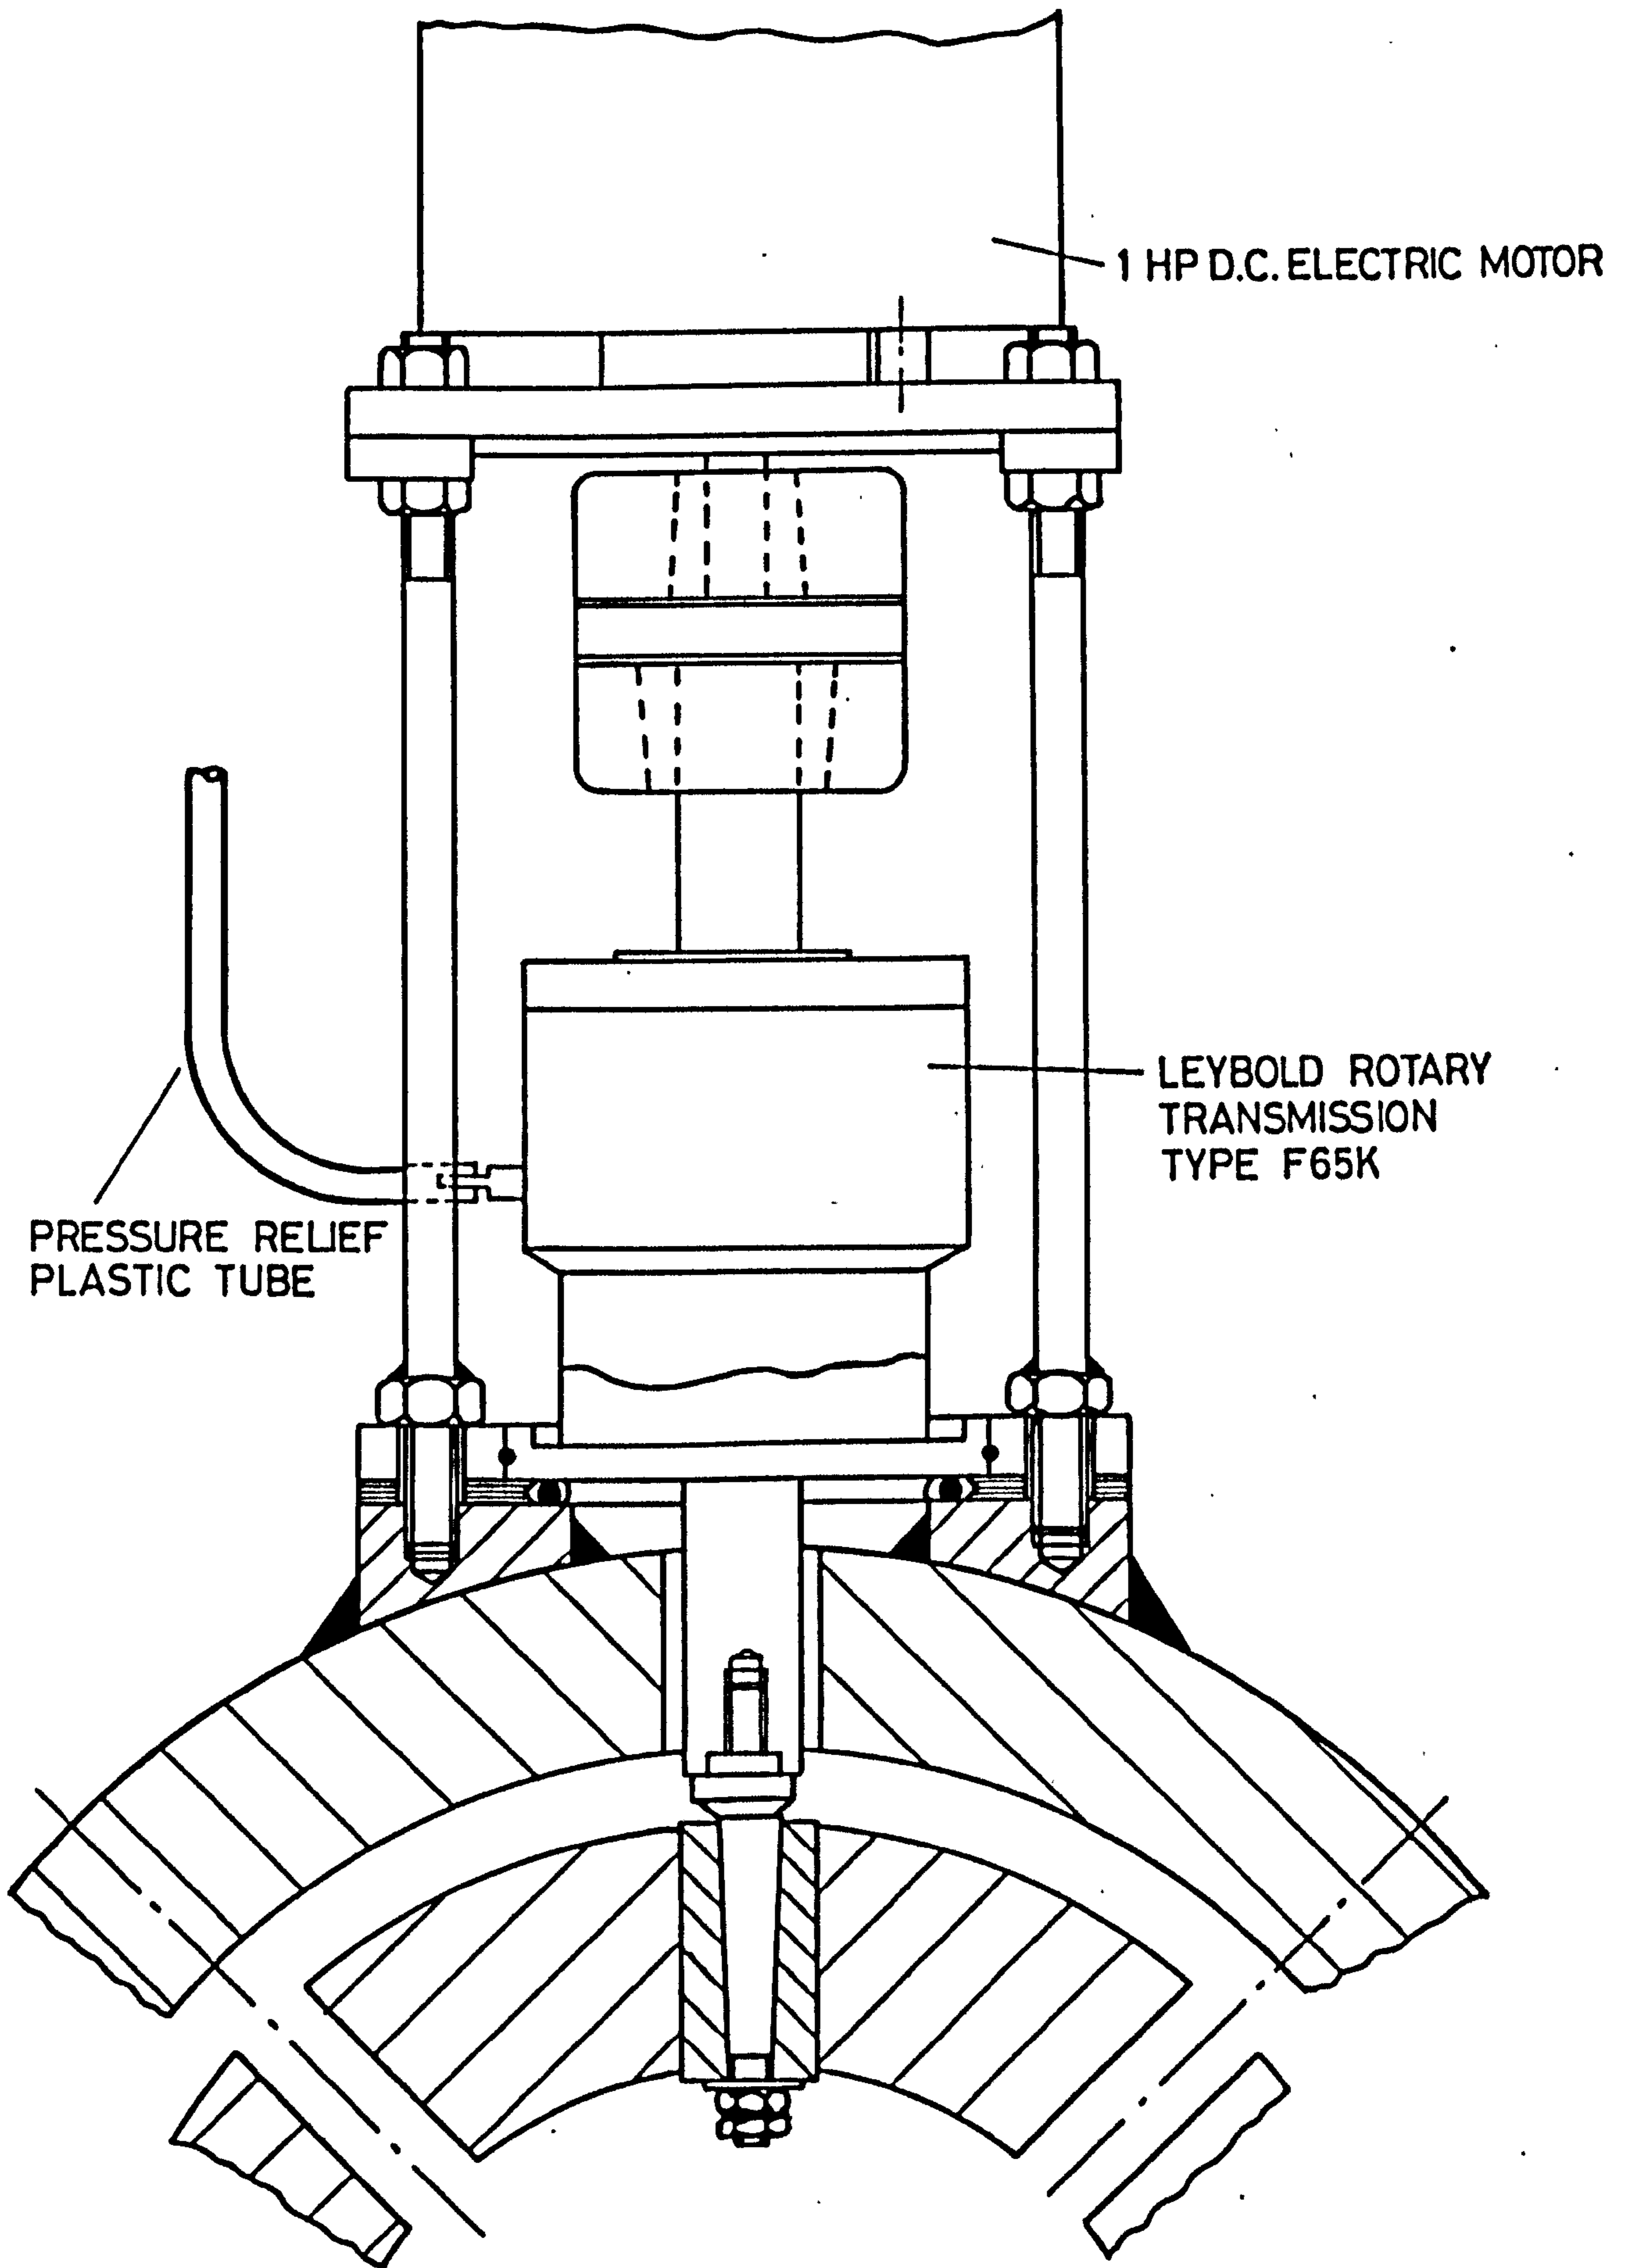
PRESENT ASSEMBLY OF ELECTRIC MOTORS AND FANS ON THE EXPLOSIVE VESSEL.
